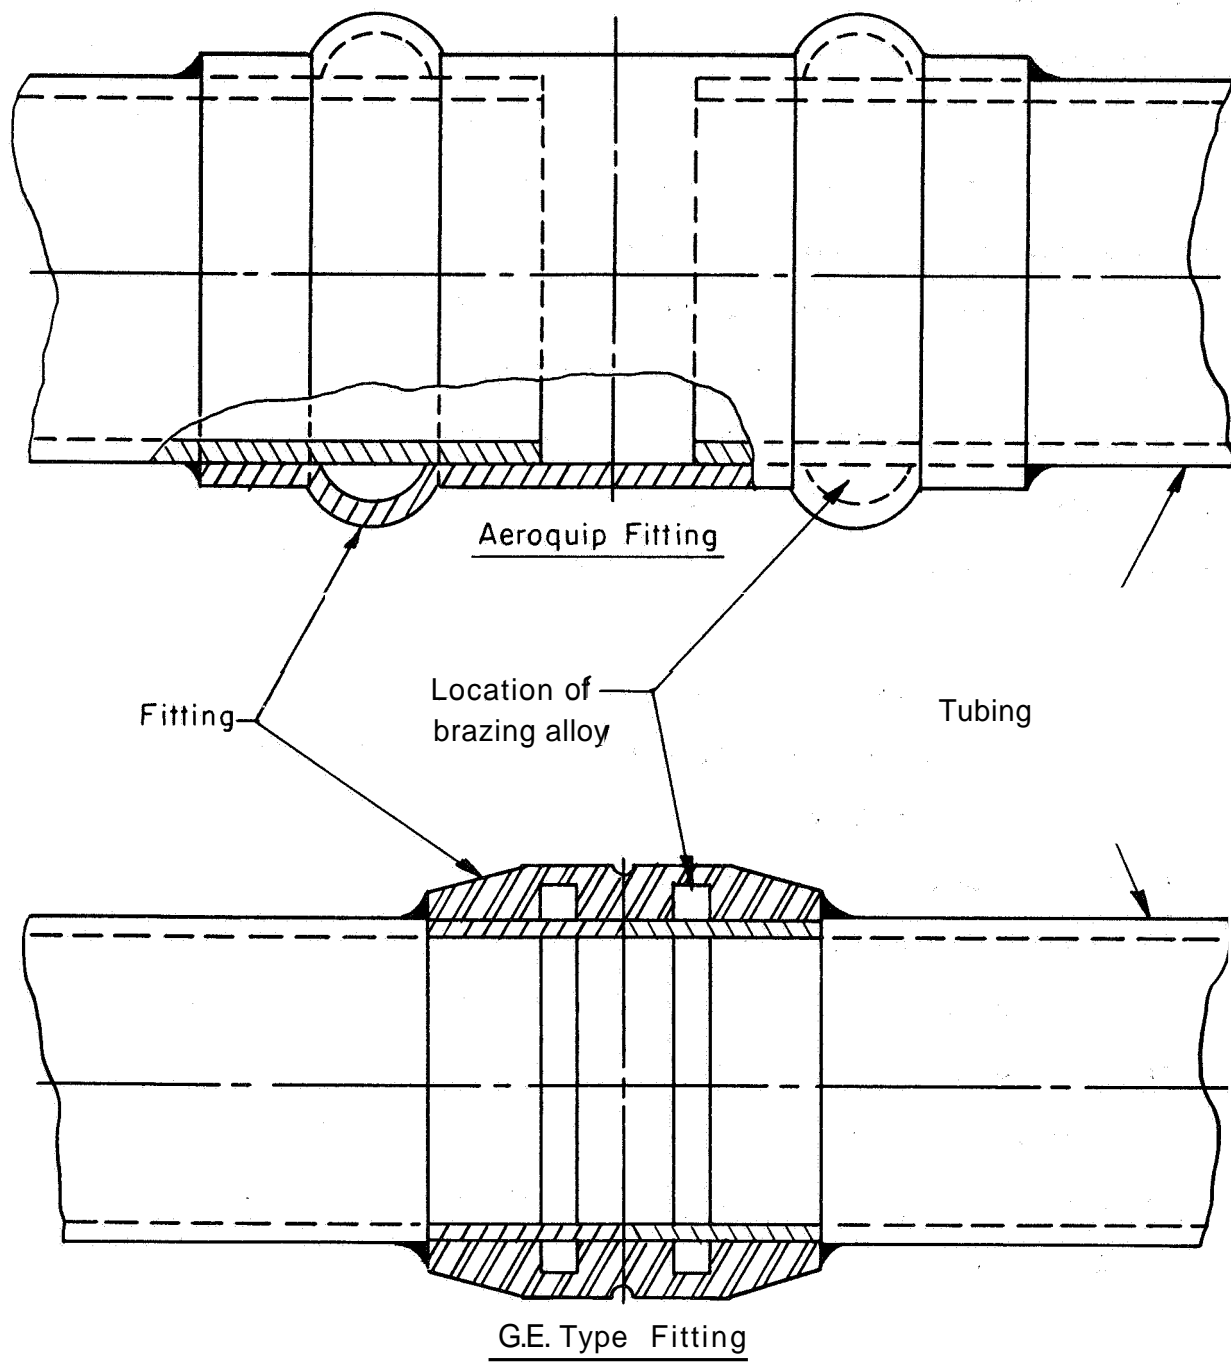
FITTINGS USED IN INDUCTION BRAZING OF STAINLESS STEEL TUBES (Ref. 79)
